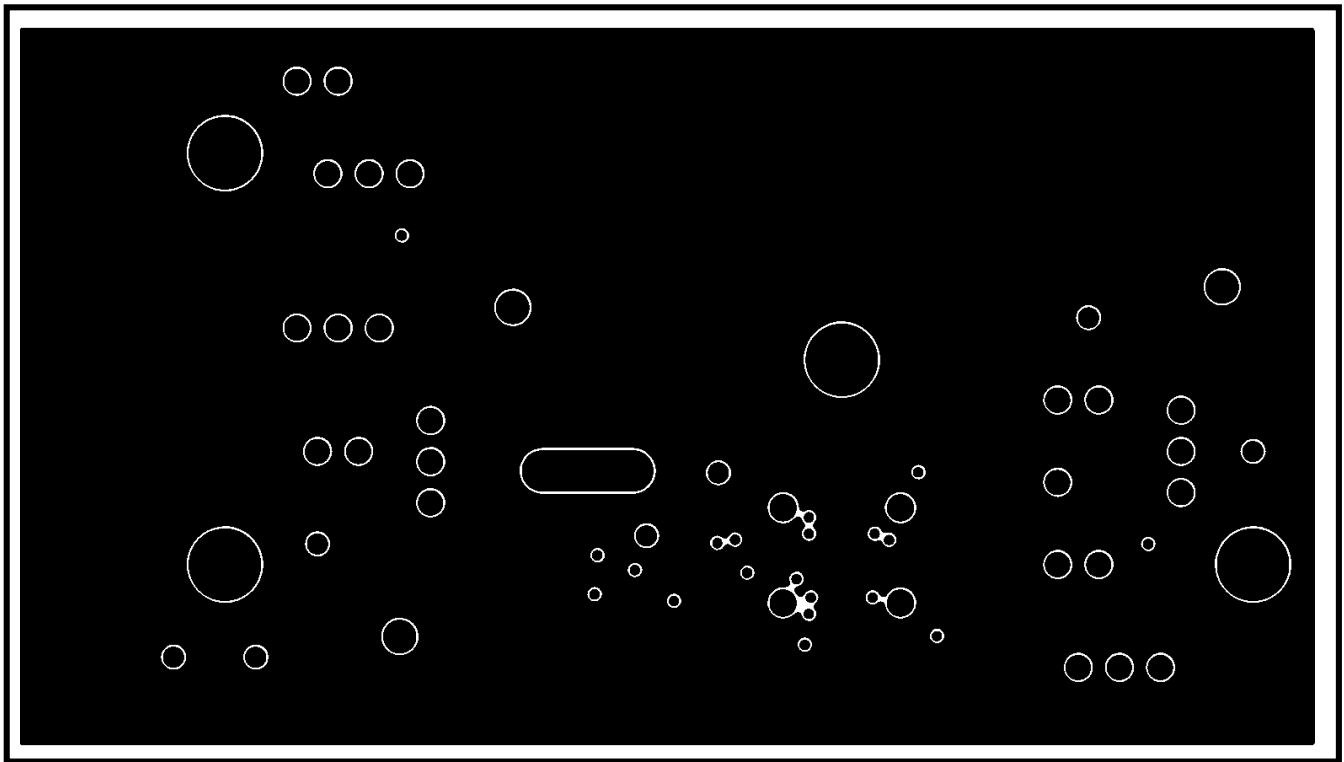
MAX3941 EV Kit PC Board Layout—Ground Plane
